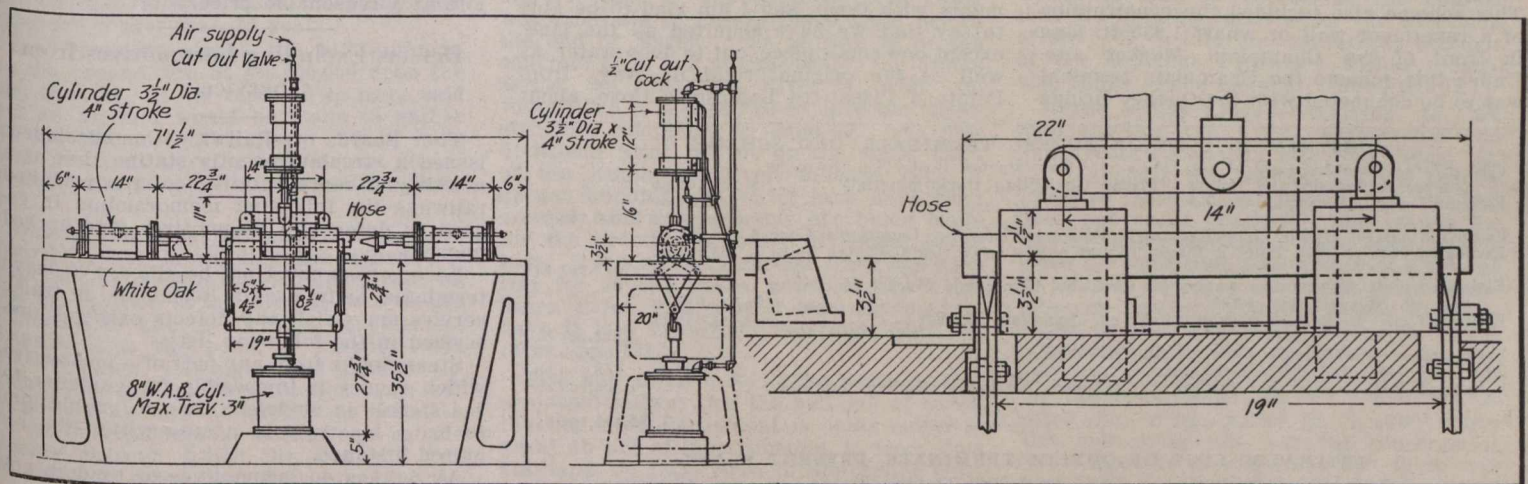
C.N.R. Hose Mounting Machine, with Detail of Clamping Heads.
